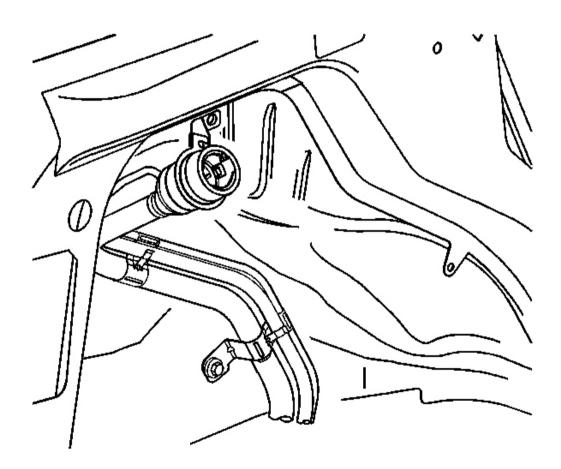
View Of Fuel Filler Pipe Intermediate Bracket Bolt Courtesy of GENERAL MOTORS CORP.
